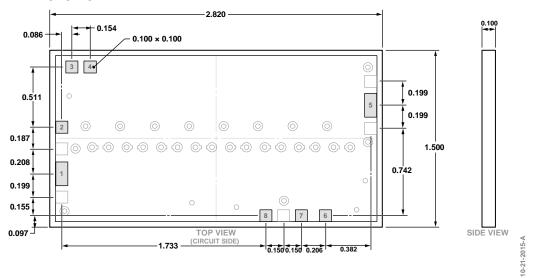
8-Pad Bare Die [CHIP] (C-8-6) Dimensions shown in millimeter
